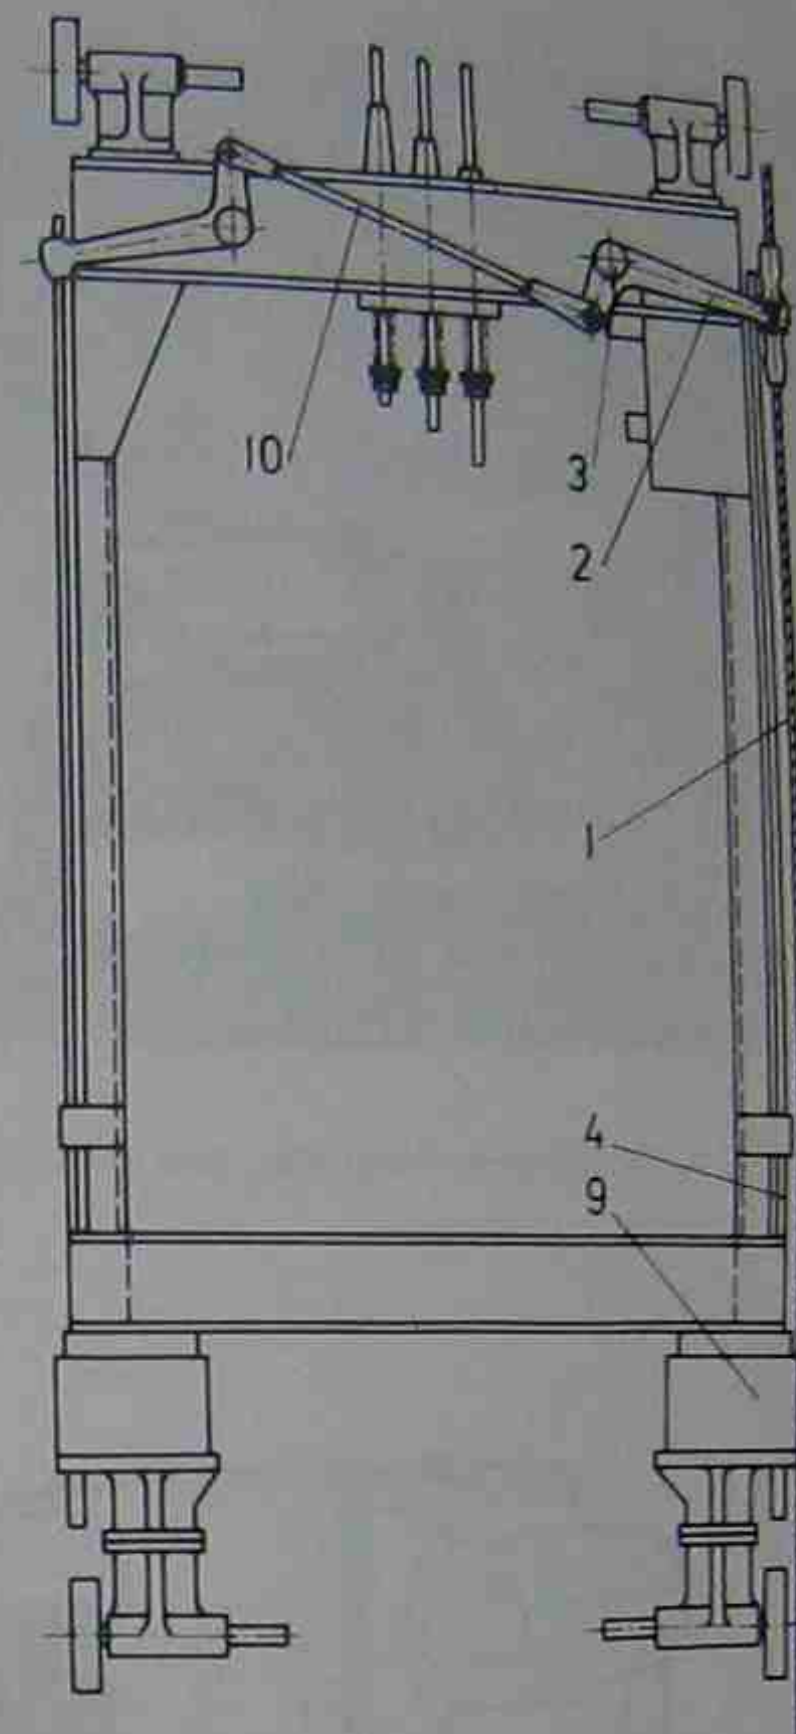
Operating mechanism of flexible guide clamp safety gear. 1. Governor rope; 2 & 5. Lever; 3. Shaft; 4 & 6. Operating rods; 7 & 8. Gibs; 9. Clamp; 10. Connecting rod.
